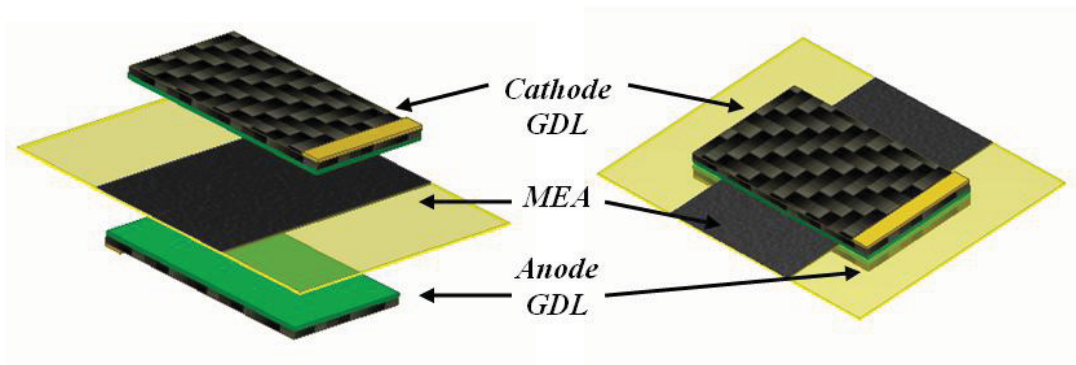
Views of the cathode GDL, anode GDL and MEA assembly.
